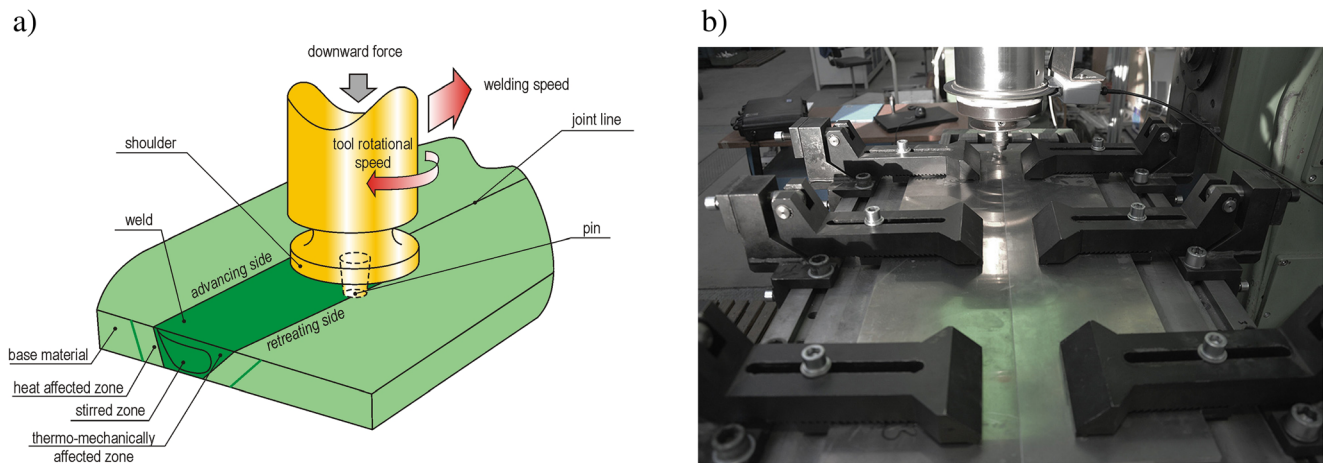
Friction stir welding. a A scheme of the process. b An experimental setup with the clamping system
